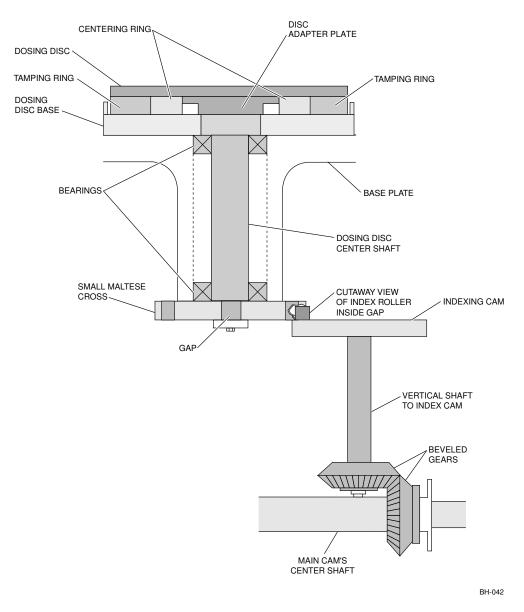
Cutaway View of Dosing Station Shaft, Adapter, Disc, and Maltese Cross
